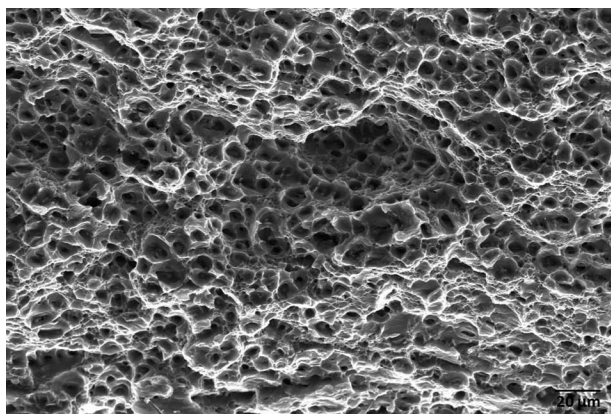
High magnified fractograph of fracture surface shown in Fig. 183 indicating equiaxed dimples indicating ductile fracture
